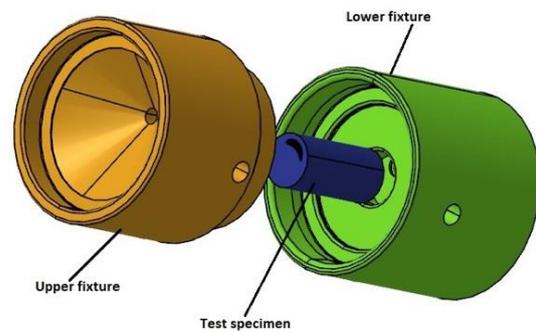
Exploded assembly of the test sample fixture, including the test sample
